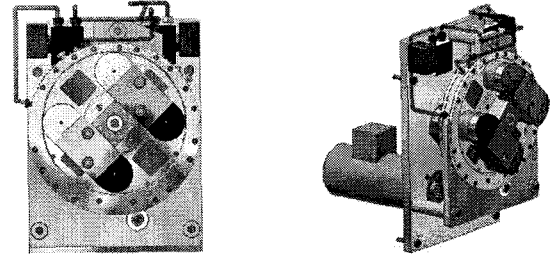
Rotary magnetic refrigerator of Cooltech Appliances.
